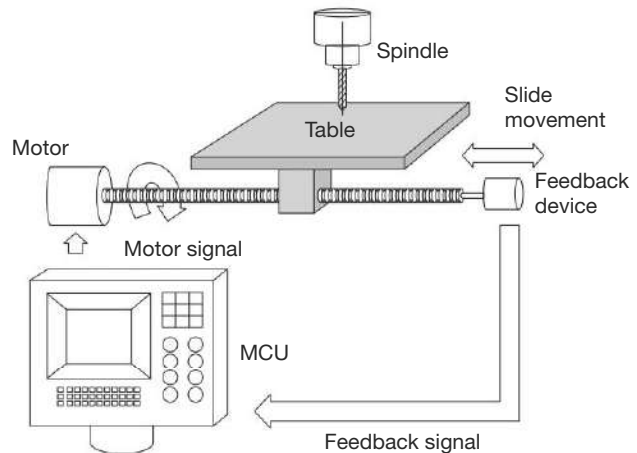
The data processing in a CNC machine tool in closed-loop control
